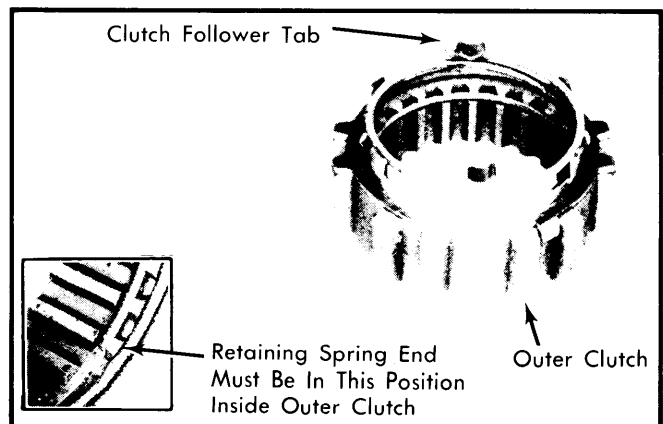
Installing Retaining Spring and Clutch Follower to Outer Clutch With Inset Showing Inner Spring End
